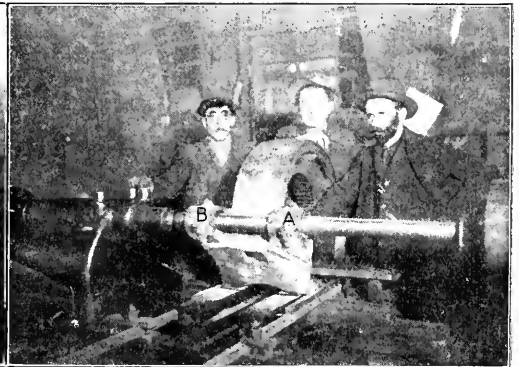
Motor frame restored by oxyacetylene welding
